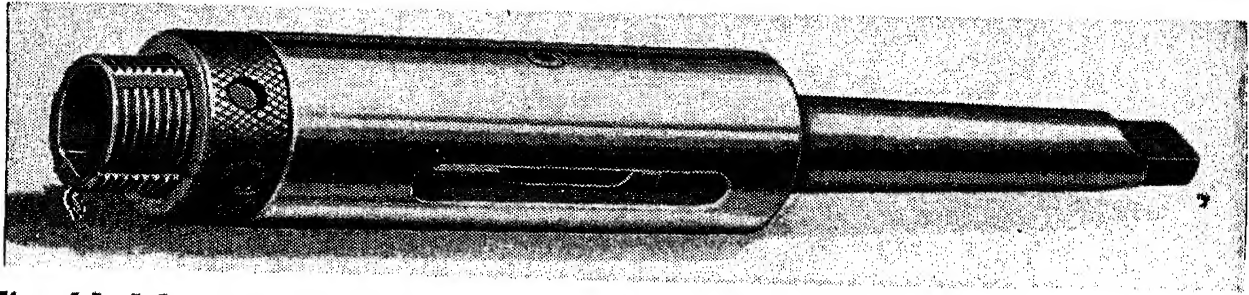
An adjustable extension assembly with a Use-Em-Up hole.
